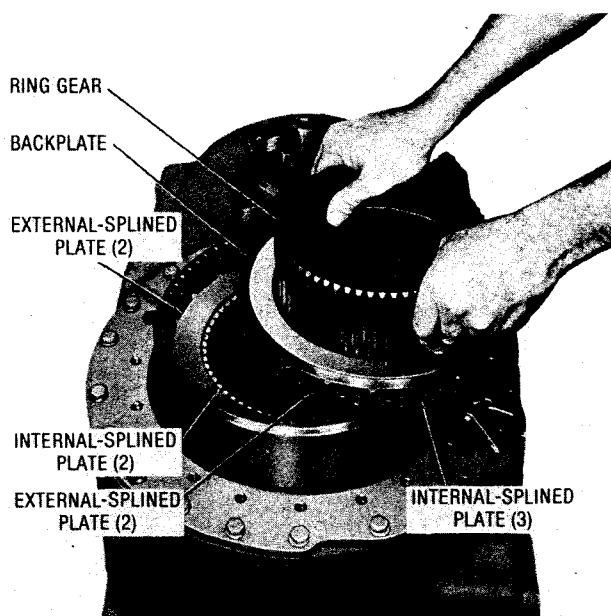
Removing high-range ring gear and low-range clutch plates (TRT 2221-1, 2421-1)
